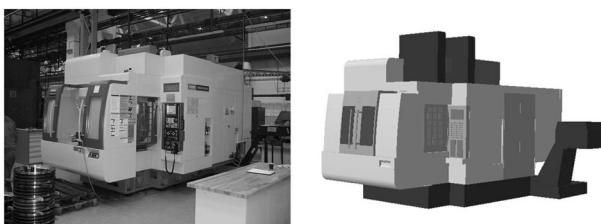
Machine tool and its DMU - Thyssen Krupp, PSL [8].
